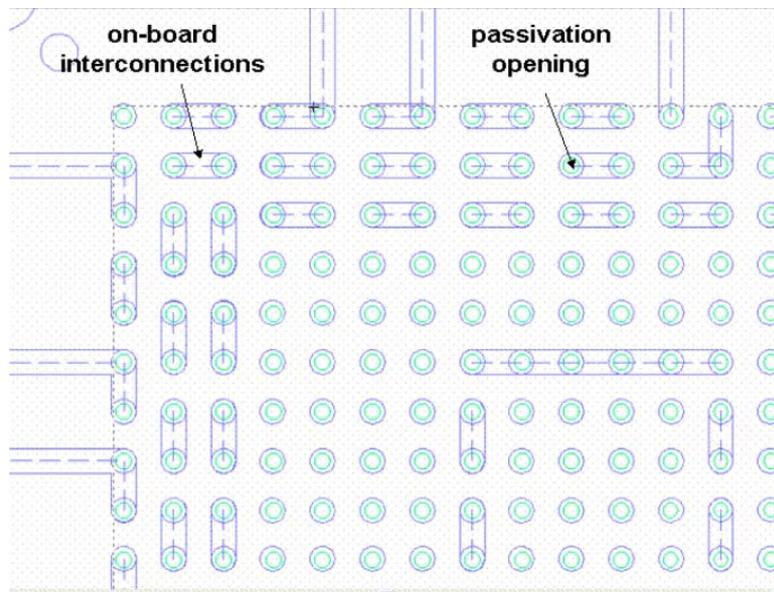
(a) shows the layout of Si test board with a size of 40 \times 50mm². It should be noted that this test board was initially designed for measurement of 20 \times 20mm² test chips, but each quarter of the chip area includes independent daisy chain designs. Hence, the test chip as described above can be assembled to any quarter area for
